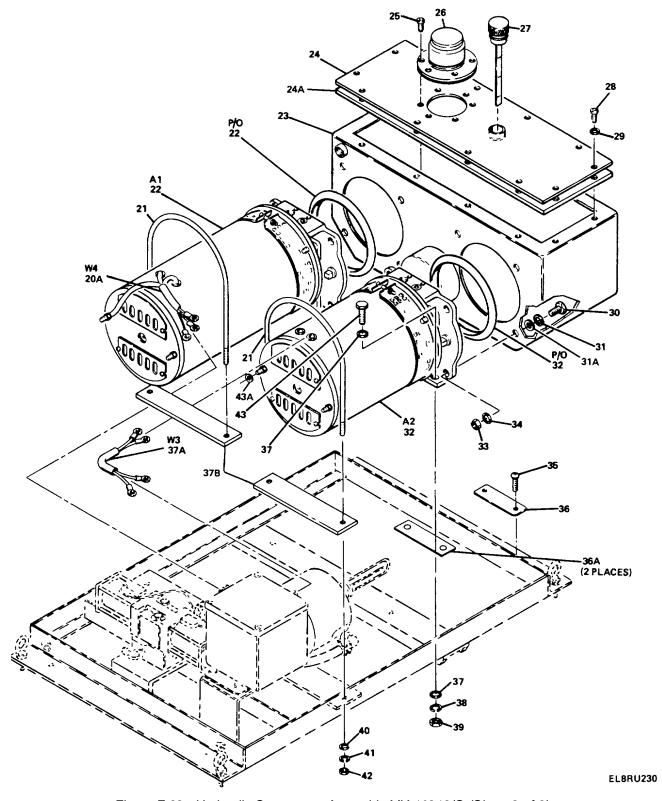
Hydraulic Component Assembly MX-10213/G (Sheet 2 of 3)
